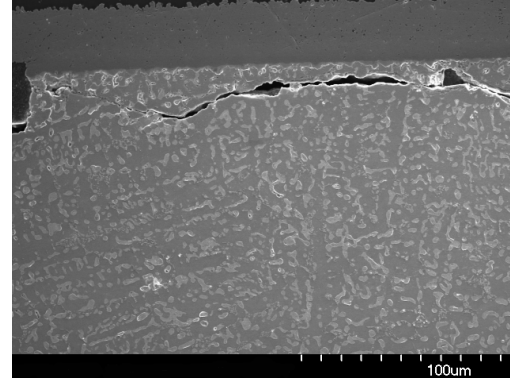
SEM images (500X) of BGAs where the solder mask was applied. First letter corresponds to type of solder paste on pad and the second to solder type on the component.
